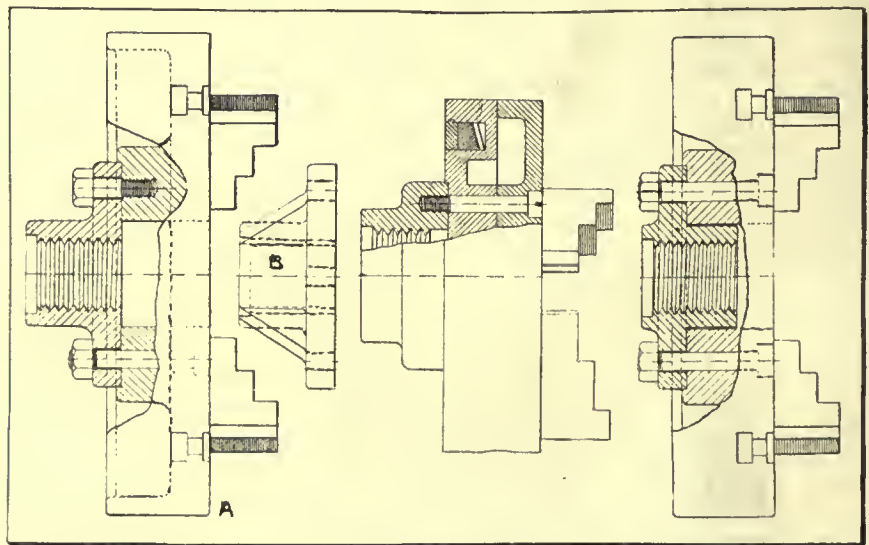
STANDARD TYPES OF BACK PLATES (ATTACHING CHUCKS).
